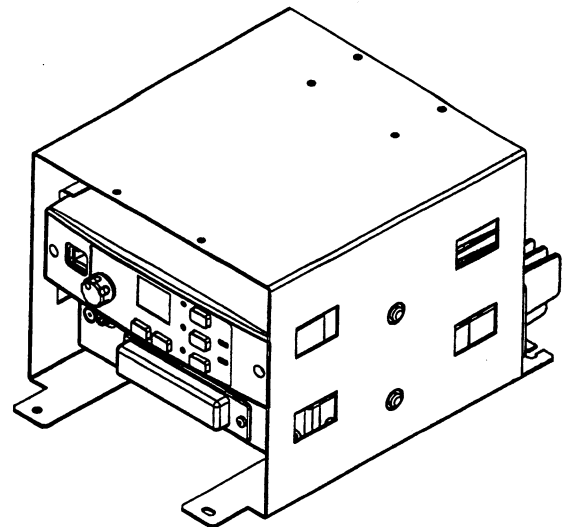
Assembled Transceiver Bracket (shown for a table top mount)
